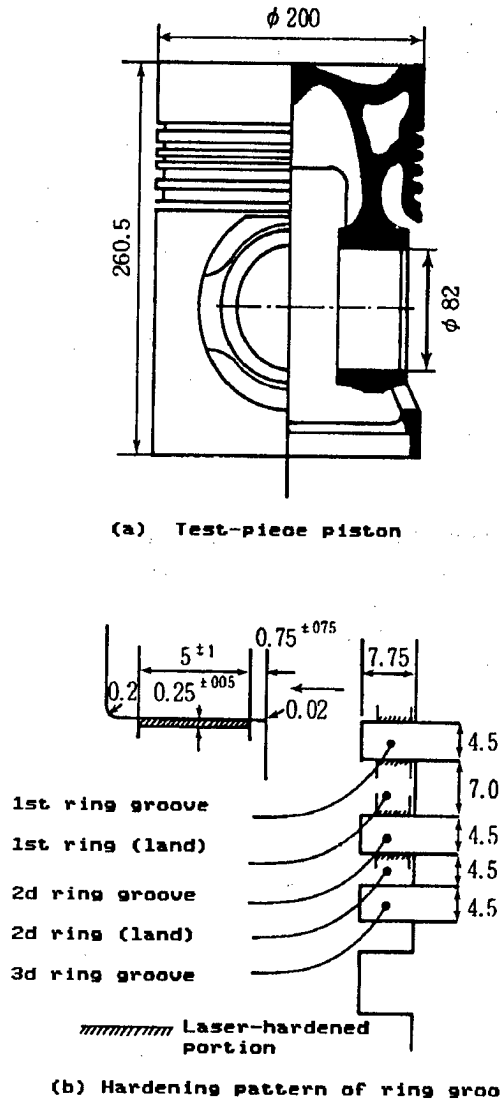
Dimensional Drawing of Piston Copied From Yanmar Diesel Engine Co. Used in Hardening Piston Ring Grooves Using a Laser Beam
